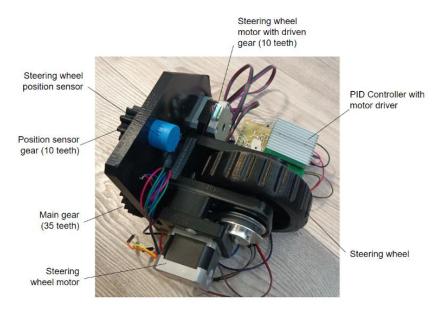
Appearance of the mock-up sample of the swivel wheel module
